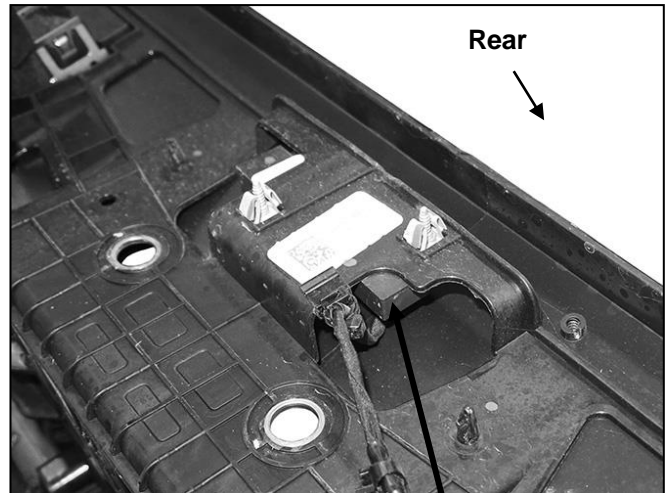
Replace front seal on sensor with Foam Seal. Push sensor and Seal into sensor Mount on the back of the Bumper
